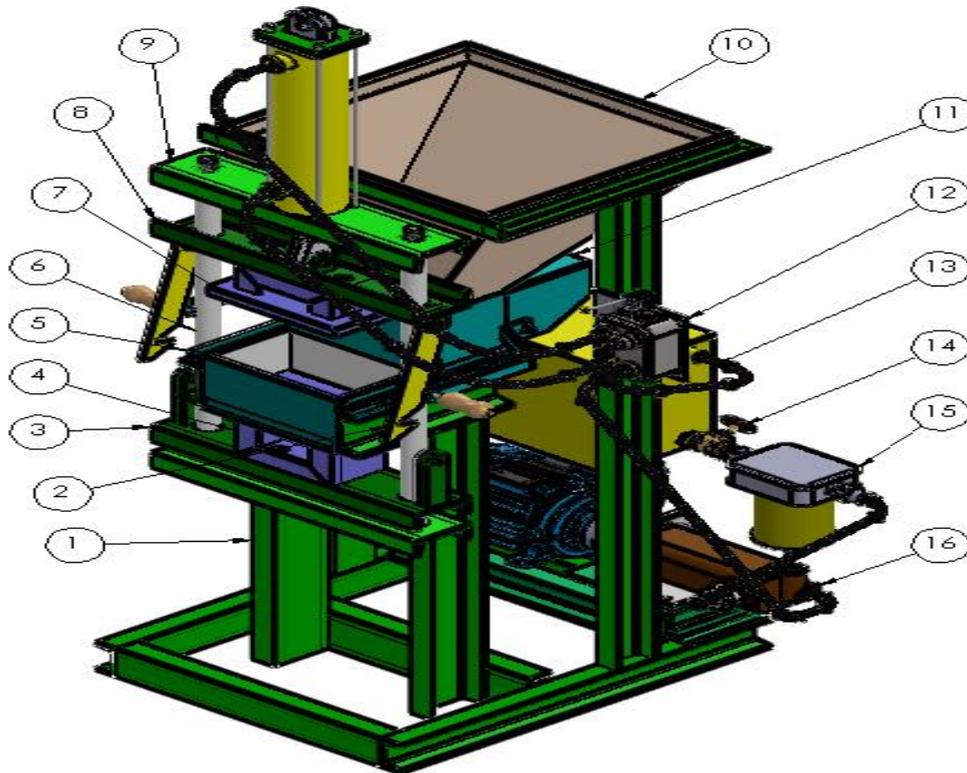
Multipurpose Brick/Block Moulding Machine (3D CAD)
